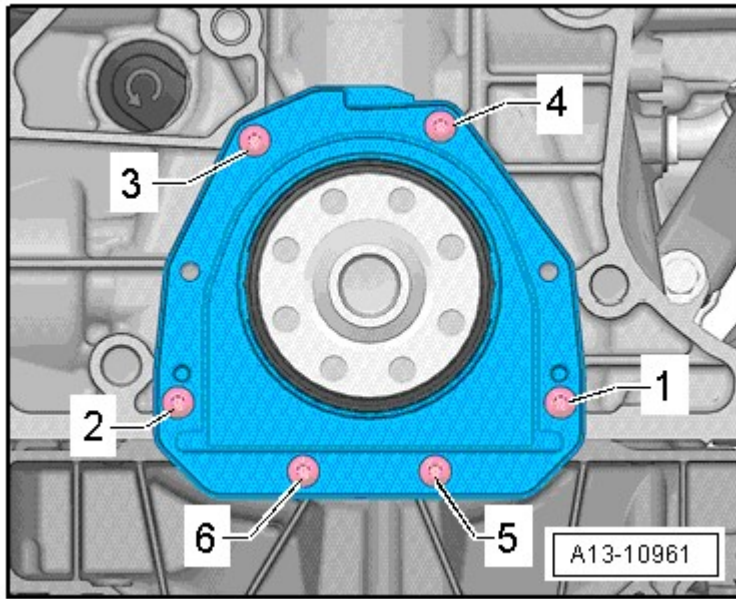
Identifying Transmission Side Sealing Flange - Tightening Sequence, with 6 Bolts
